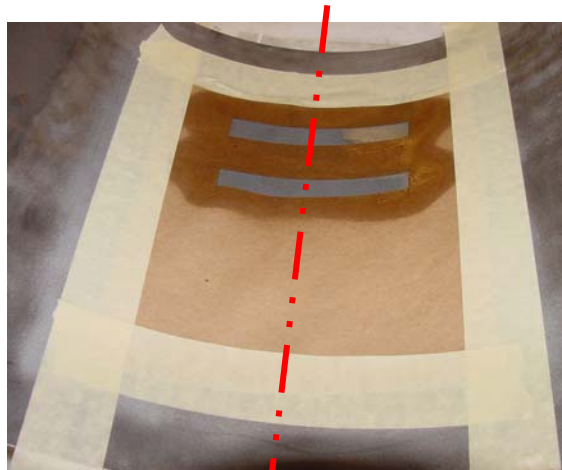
Shot Blasted Inside Diameter of Pipe Section
